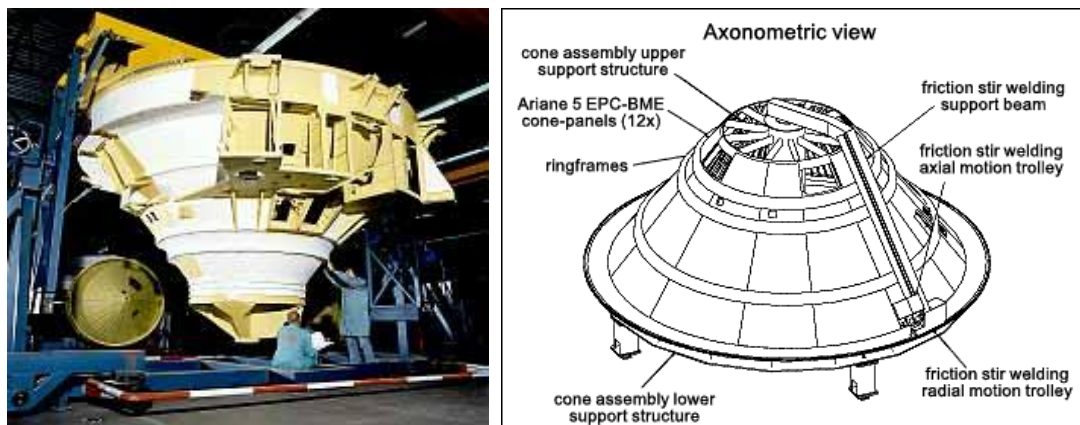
a) Assembly of Ariane 5 main motor thrust frame from 12 integrally machined, blade stiffened, flat, b) Fokker's concept for the new cone sub-assembly jig, which is multifunctional, i.e. for both Hi-lok riveting and FSW panels (Nicholas & Kallee, 2002).
